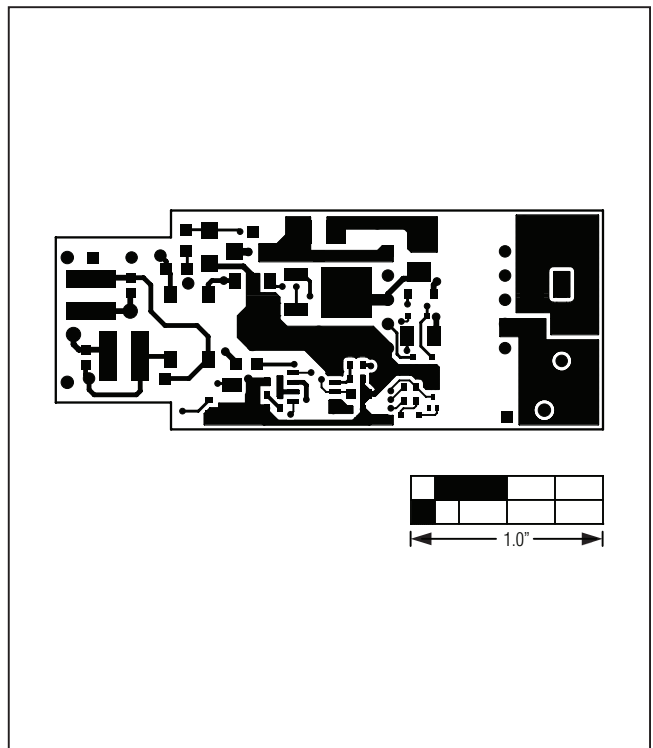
MAX16841 EV Kit PCB Layout—Solder Side
